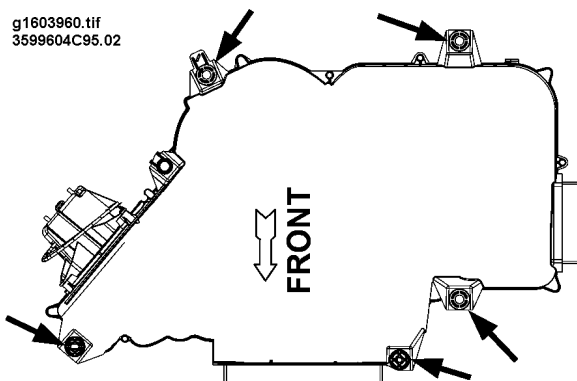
Rear HVAC Unit Mounting Bolt Locations
